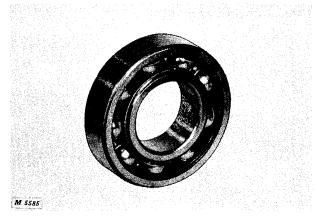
Bearing Wear Caused by Crack or Looseness on Shaft
